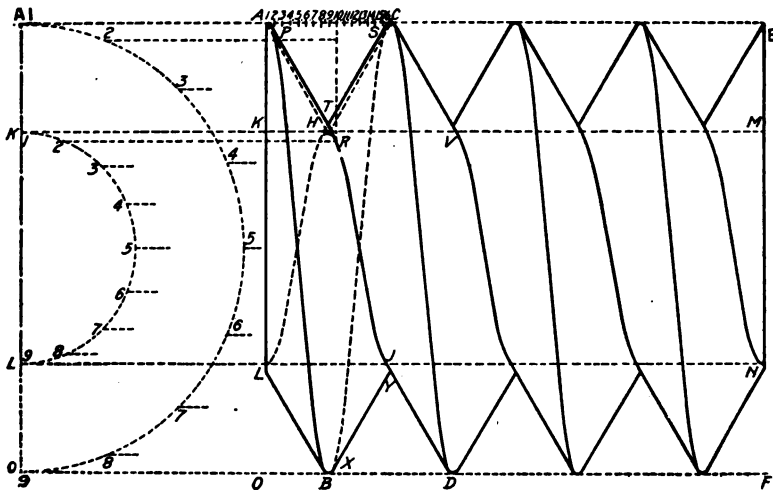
Accurate Projections of the Right-Hand V Screw Thread
